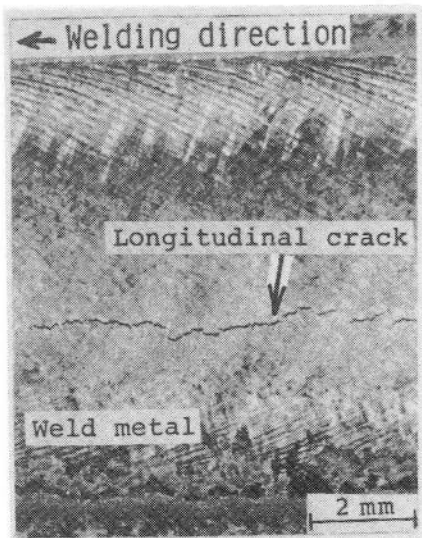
Longitudinal cracks in SUS 310S-(D) weld metal made by GTA bead welding at high speed of 1000mm/min.
